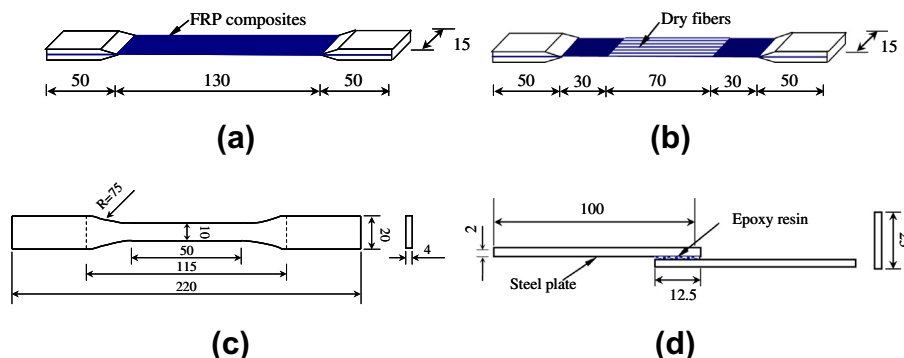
Test coupons (mm): (a) FRP tensile test coupon; (b) dry fiber sheet tensile test coupon; (c) epoxy resin tensile coupon; (d) epoxy resin tensile shear coupon.
